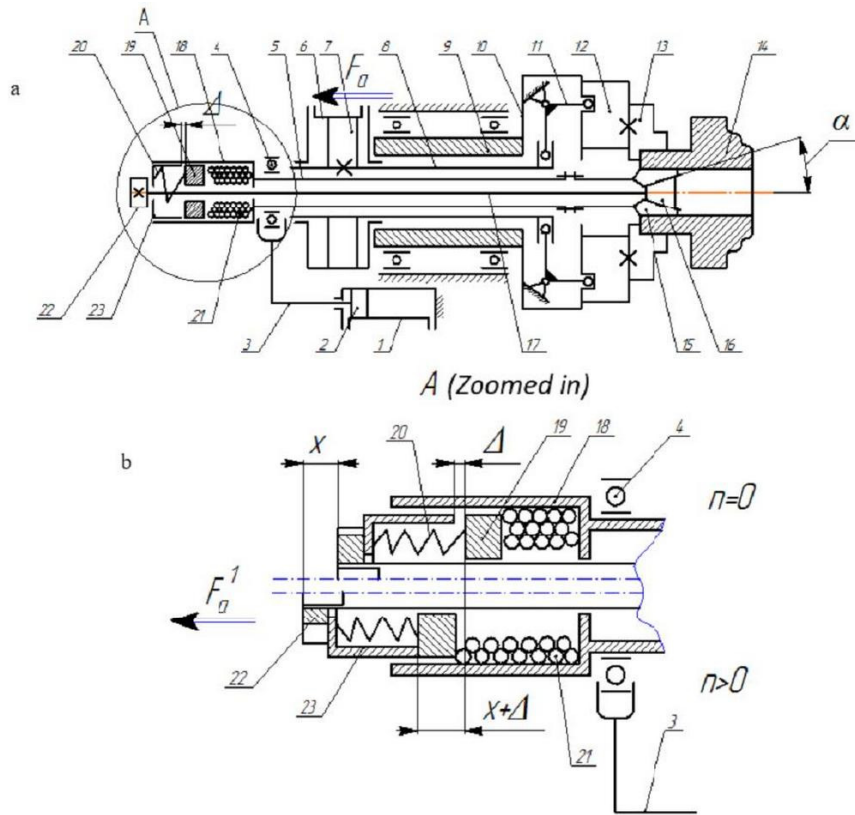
CNC lathe high-speed clamping mechanism with compensation of centrifugal forces: a - spindle line; b - ball compensator of centrifugal forces
